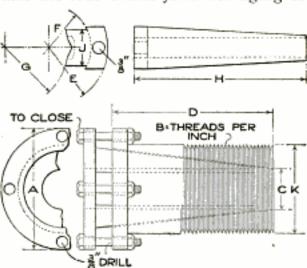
Four Jaws are Used to Clamp the Pipe in the Inner Bushing of the Machine
